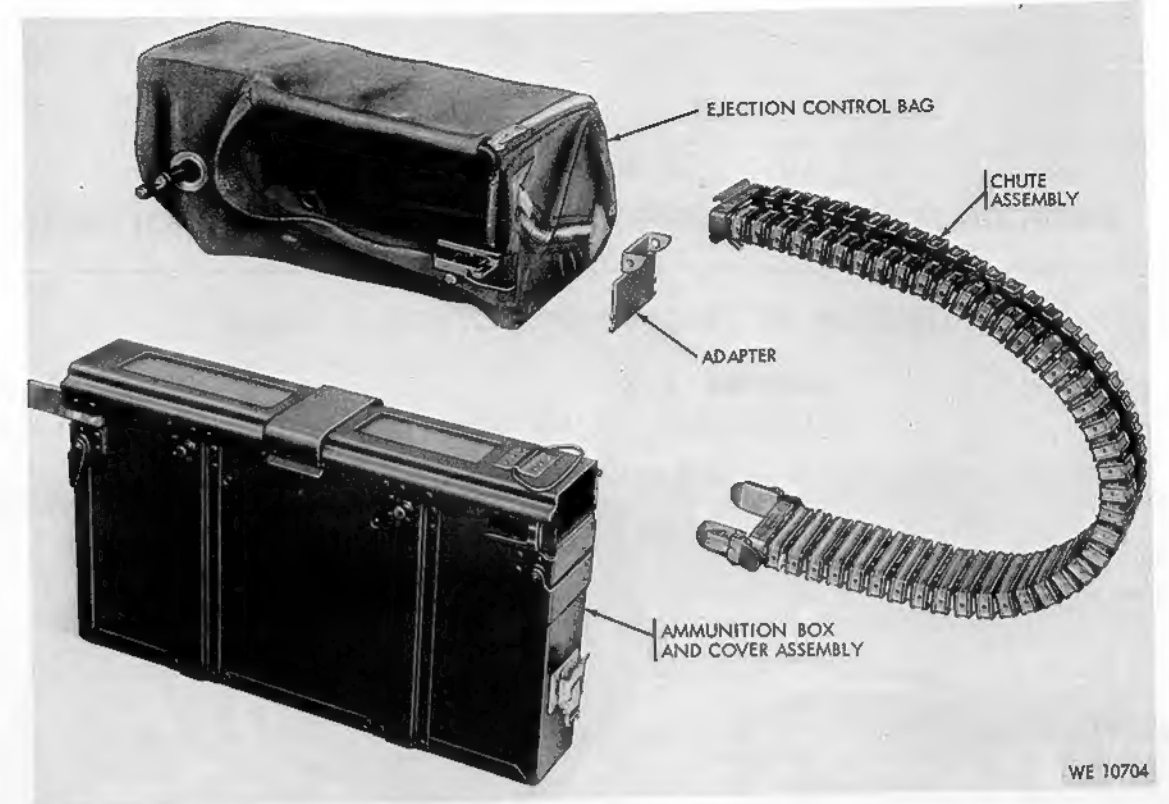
Equipment for mount assembly XM23—right and left sides.
